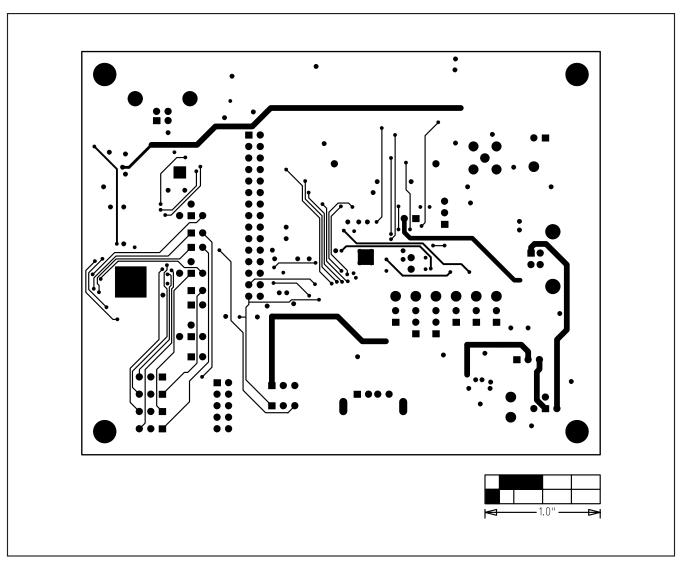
MAX14502 EV Kit PCB Layout—Solder Side
